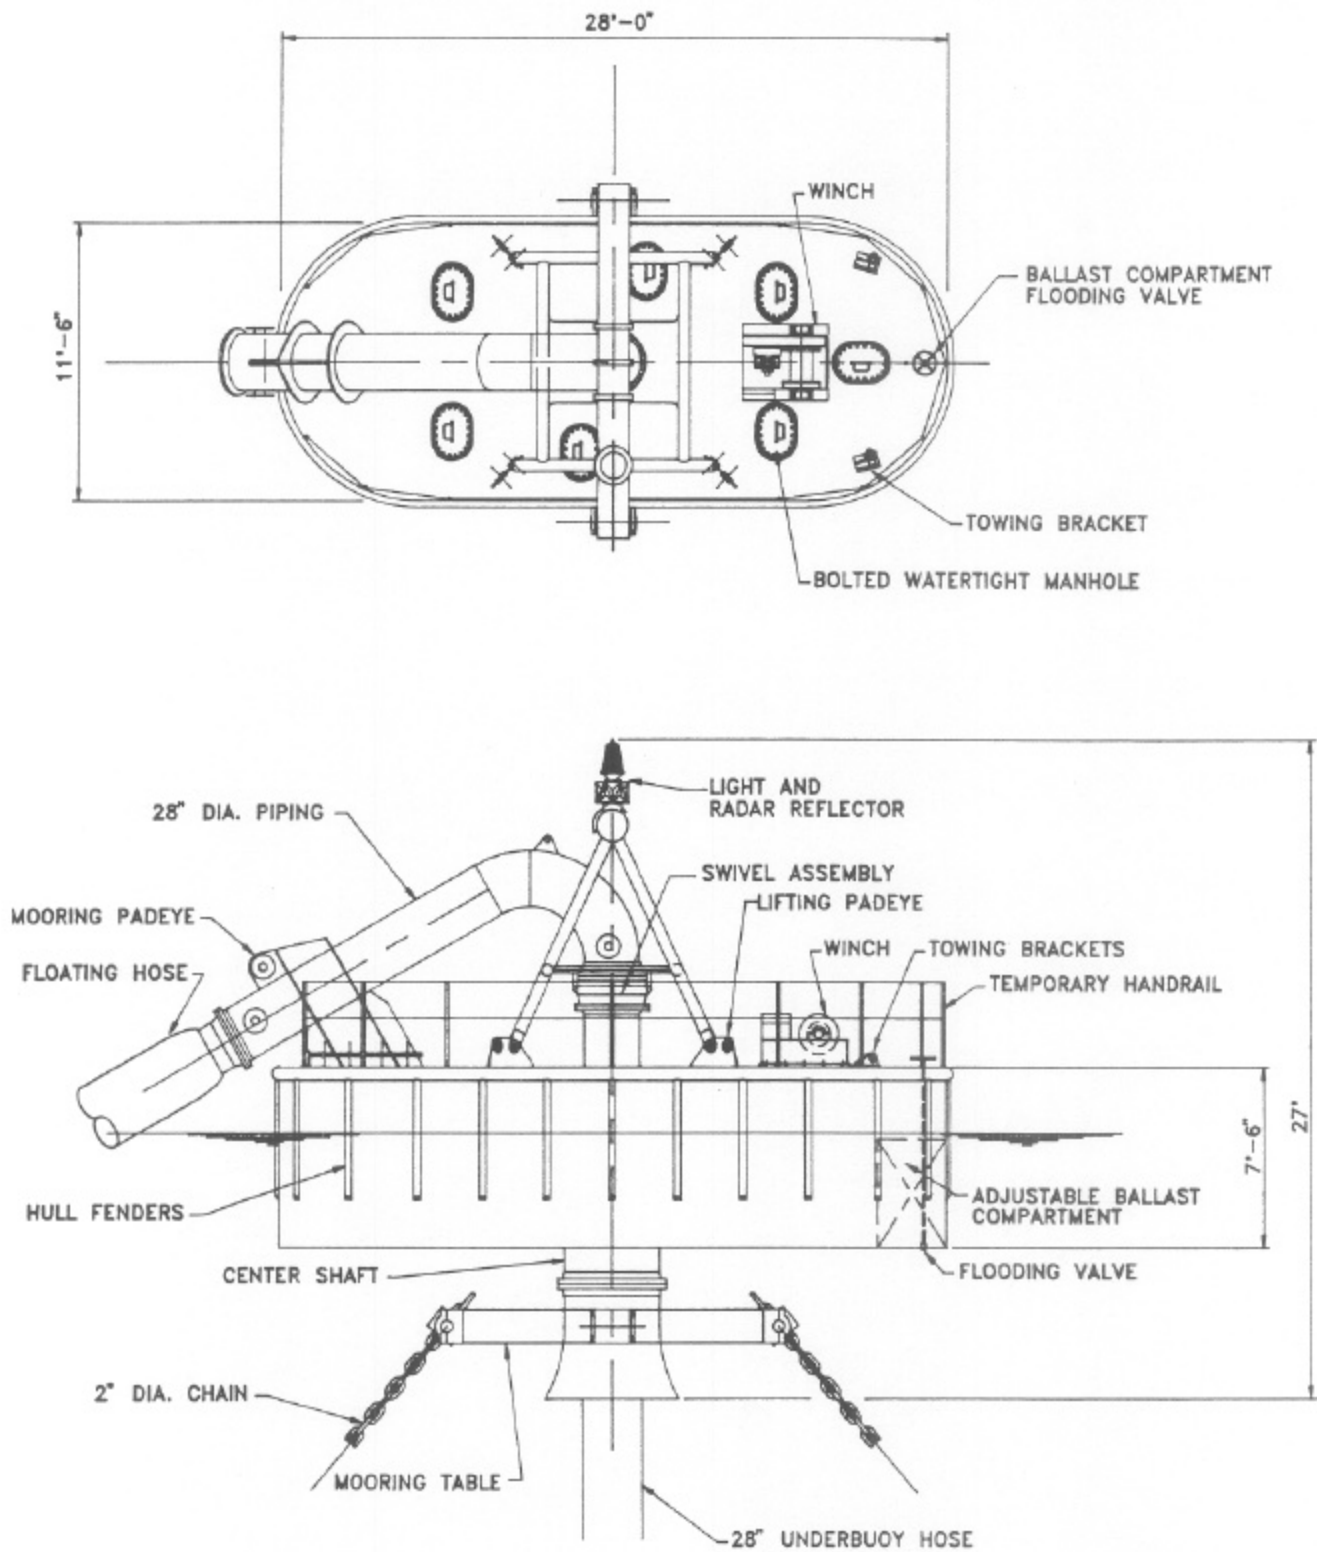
DREDGE MOORING PLAN AND ELEVATION
